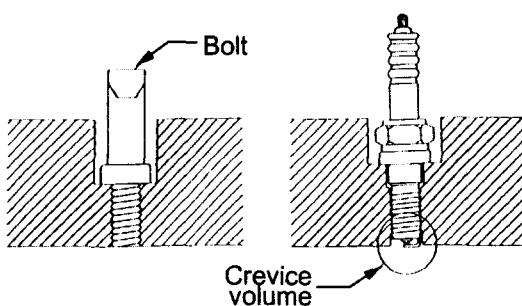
Schematic diagram of removing spark plug crevice by using bolt.
